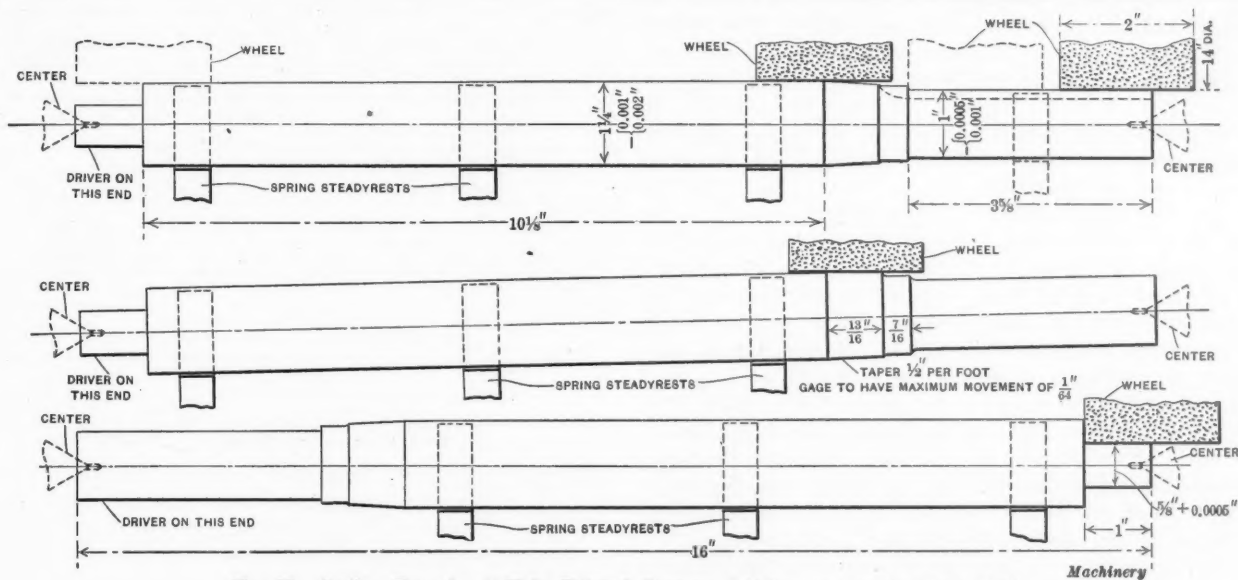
Another Example of Plain External Traverse Grinding on Shoulder Shaft Work
